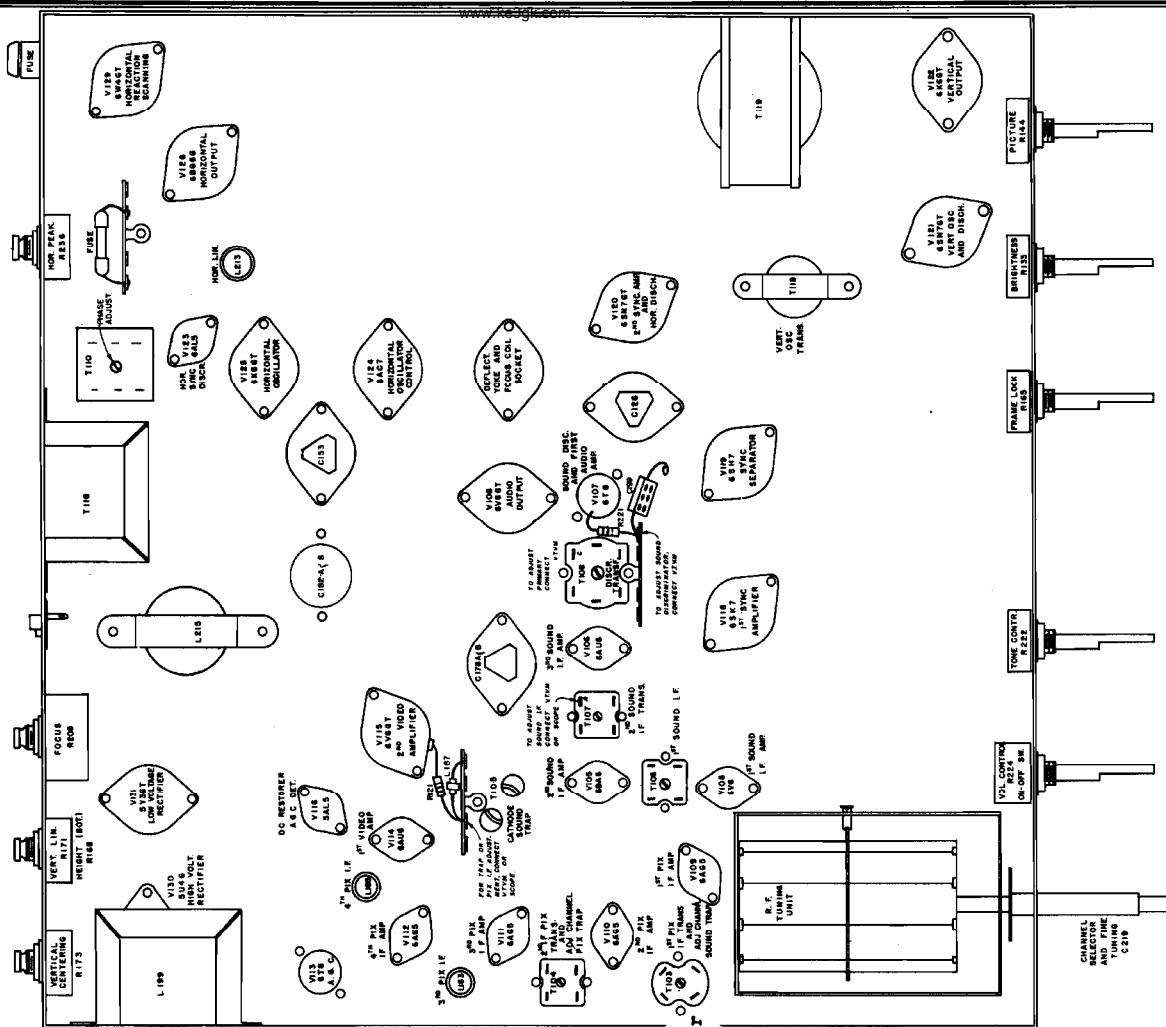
CHASSIS BOTTOM VIEW MODEL 55, 56
